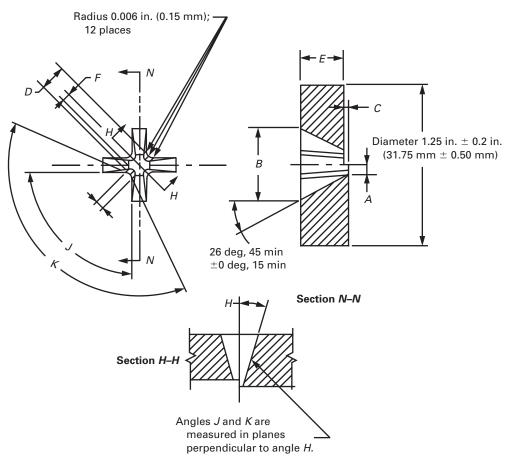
Style B GO/NO GO Ring Penetration Gage (PH), Sizes 1 Through 4
